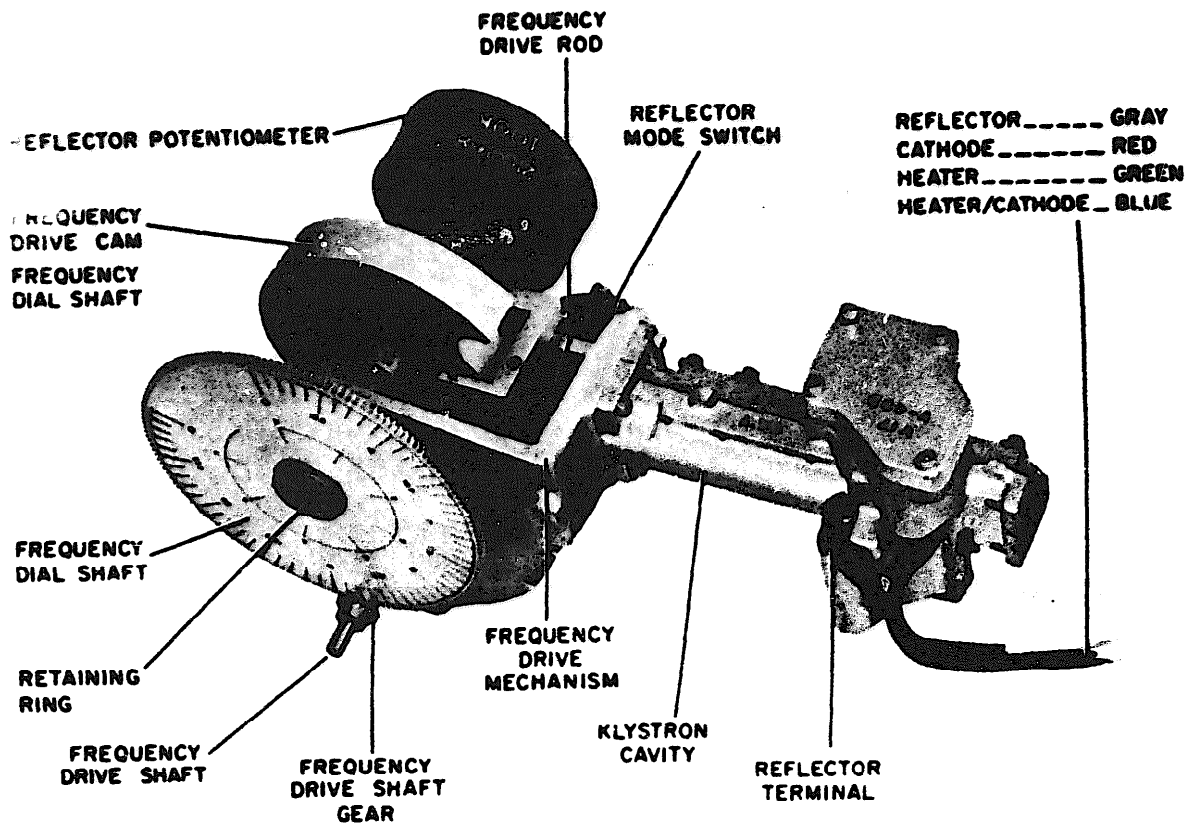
View of Klystron Cavity and Frequency Drive Mechanism
